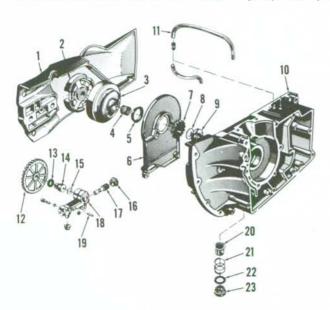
Exploded view of oil pump and clutch assemblies used on Models 65, 77, L65 and 77.
